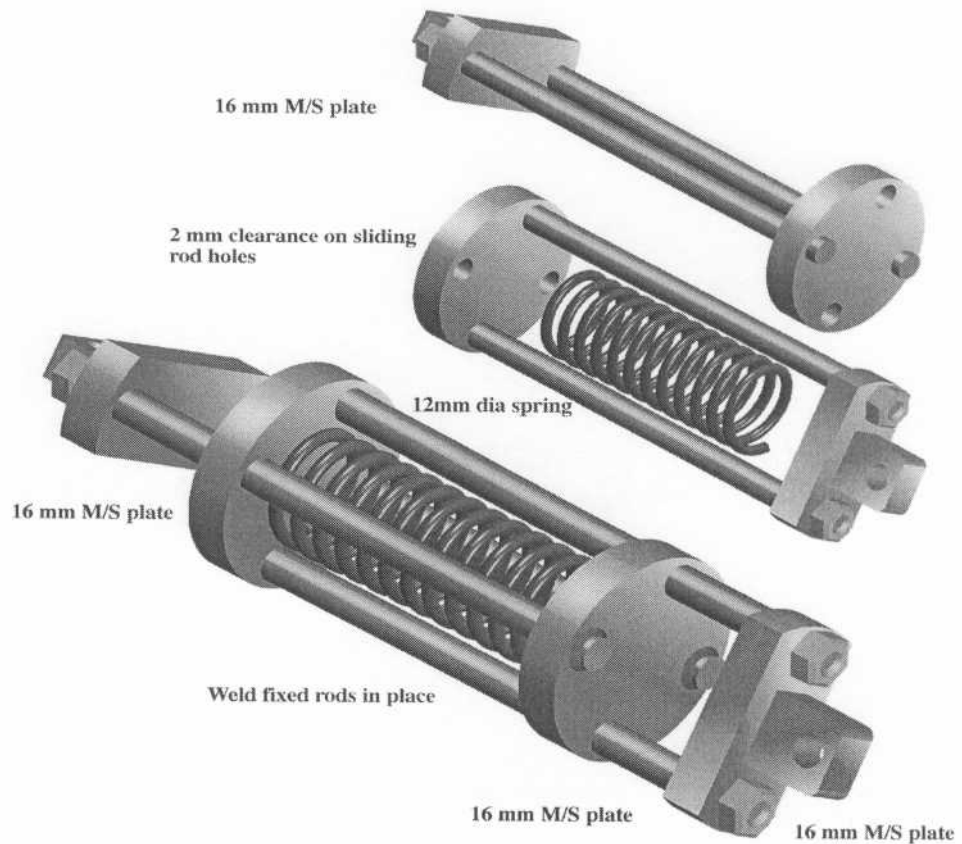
IMPROVED SHOCK ABSORBER USING A STEEL SPRING.
